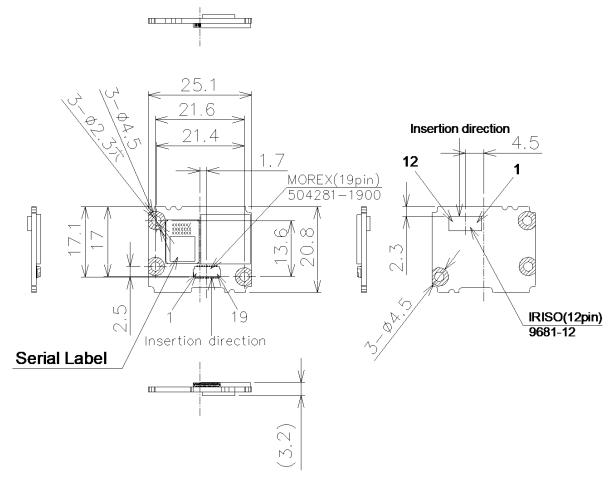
MDI-4000 and MDI-4050 Decoder Board Drawing
